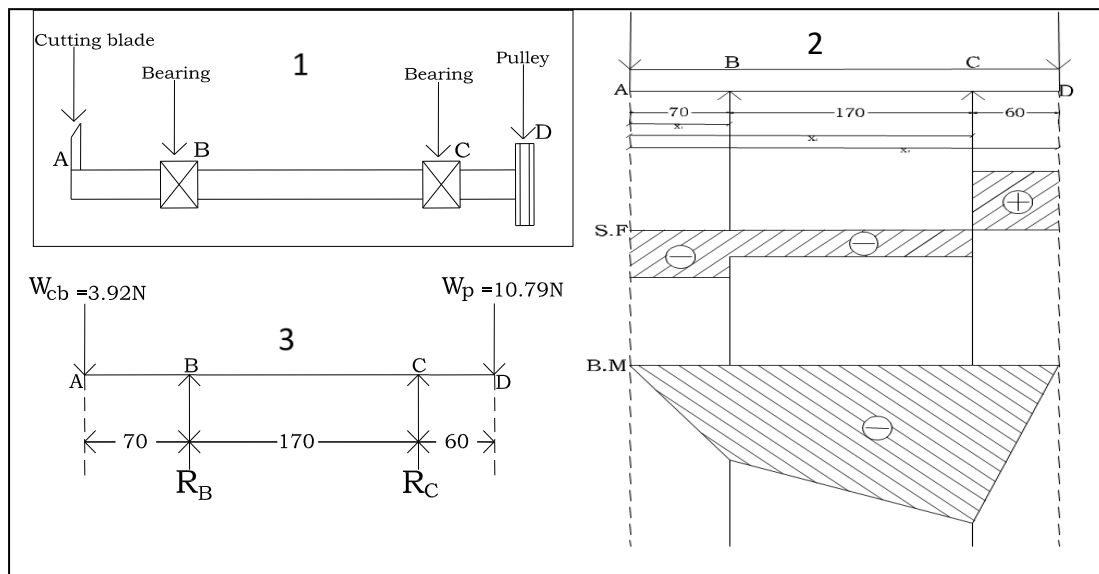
Load arrangement for the developed cassava tuber chipping machine (1) shaft, bearing, cutting blade and pulley assembly (2) Shear force (S.F) and bending moment (B.M) diagram (3) Moment about the bearing points.
